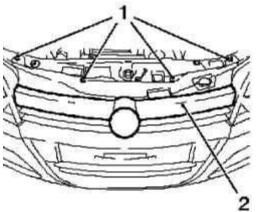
Removing the grille: 1 - rivets 2 - grille
